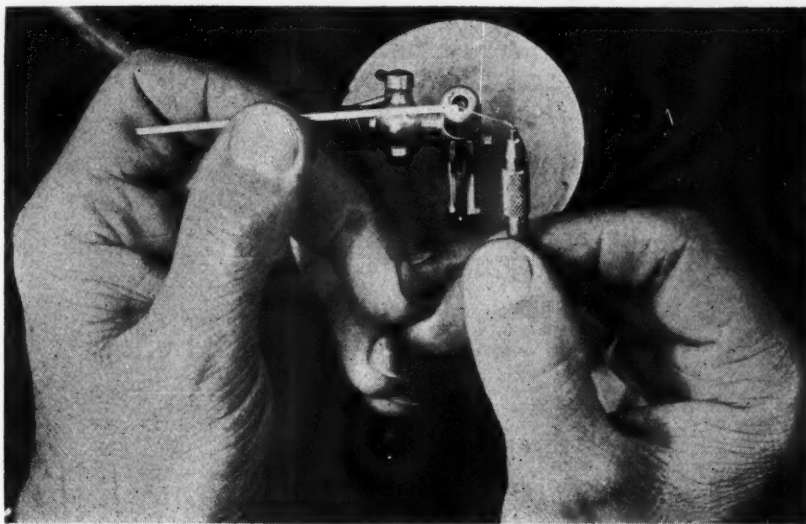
Putting a small bit of 18K. solder on the end of the half-round wire.
